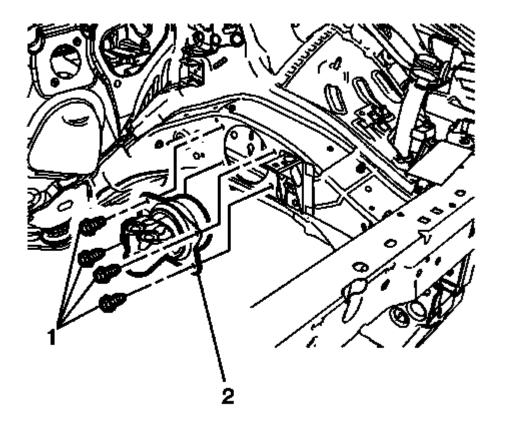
Rear Transmission Mount Through Bolt Courtesy of GENERAL MOTORS COMPANY
